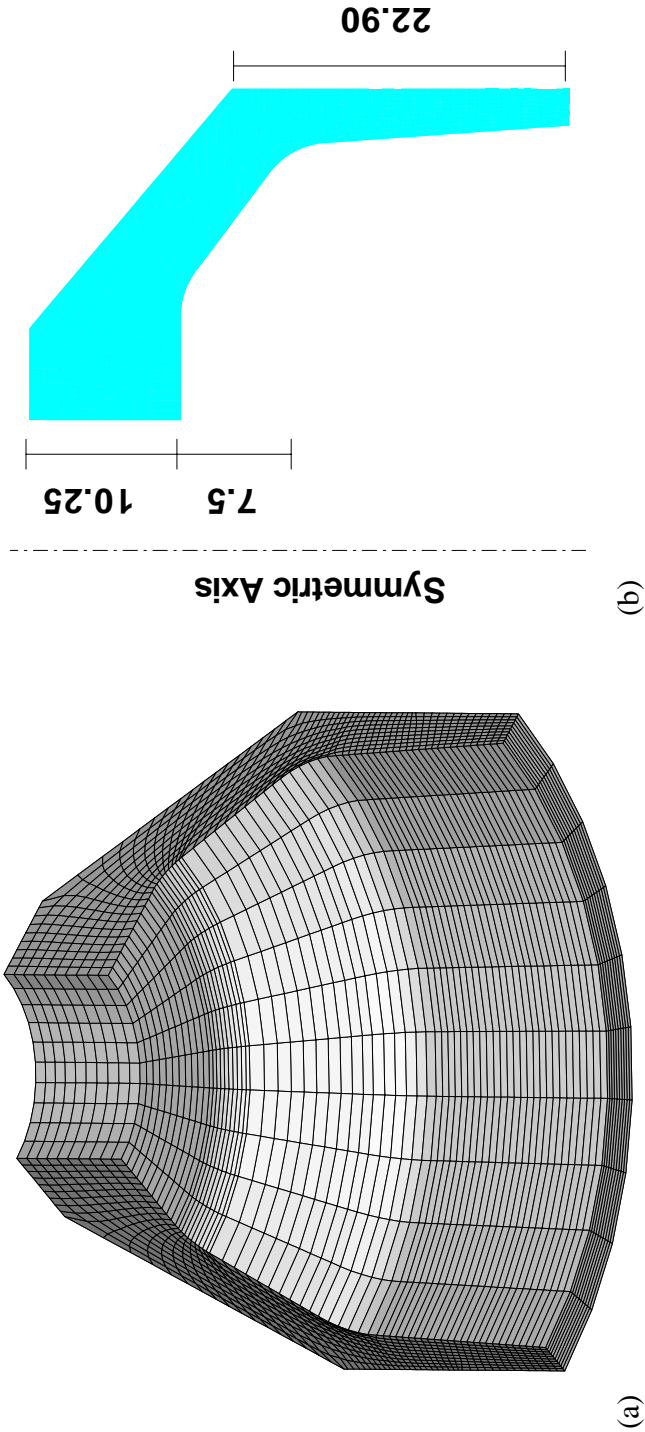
An automotive component; a) The final deformed mesh, b) The geometry of compacted specimen
